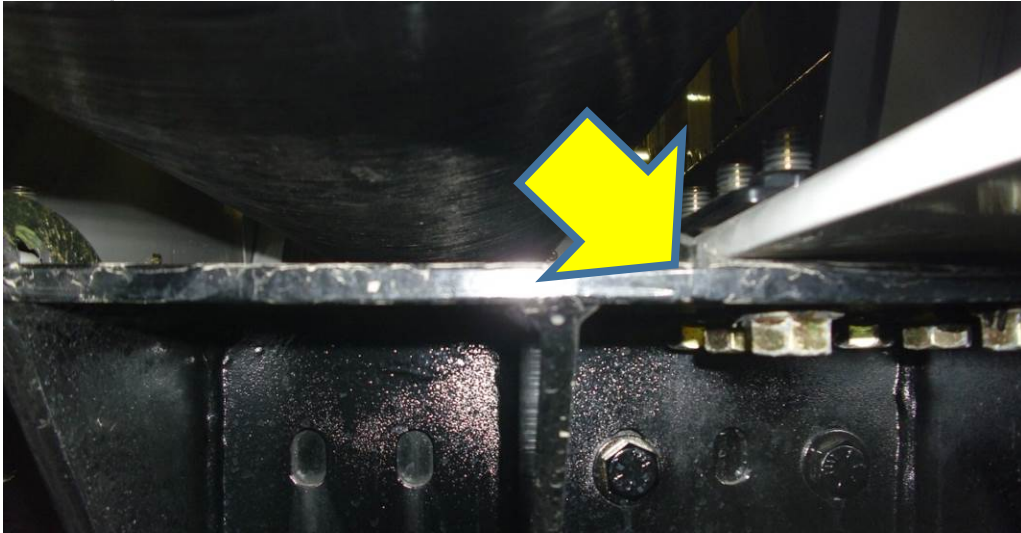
Metal-to-metal contact between the vehicle chassis rail and the fuel system cabinet can be seen in this picture. This isolator should be replaced.
